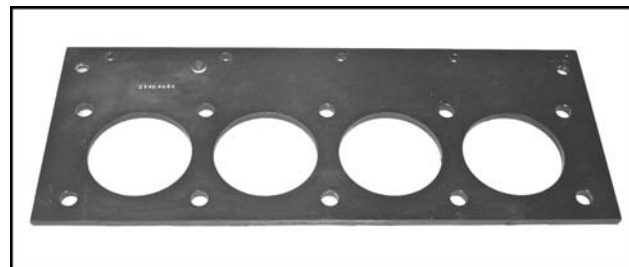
Cylinder Head Pressure Test Plate, ZTSE4534
